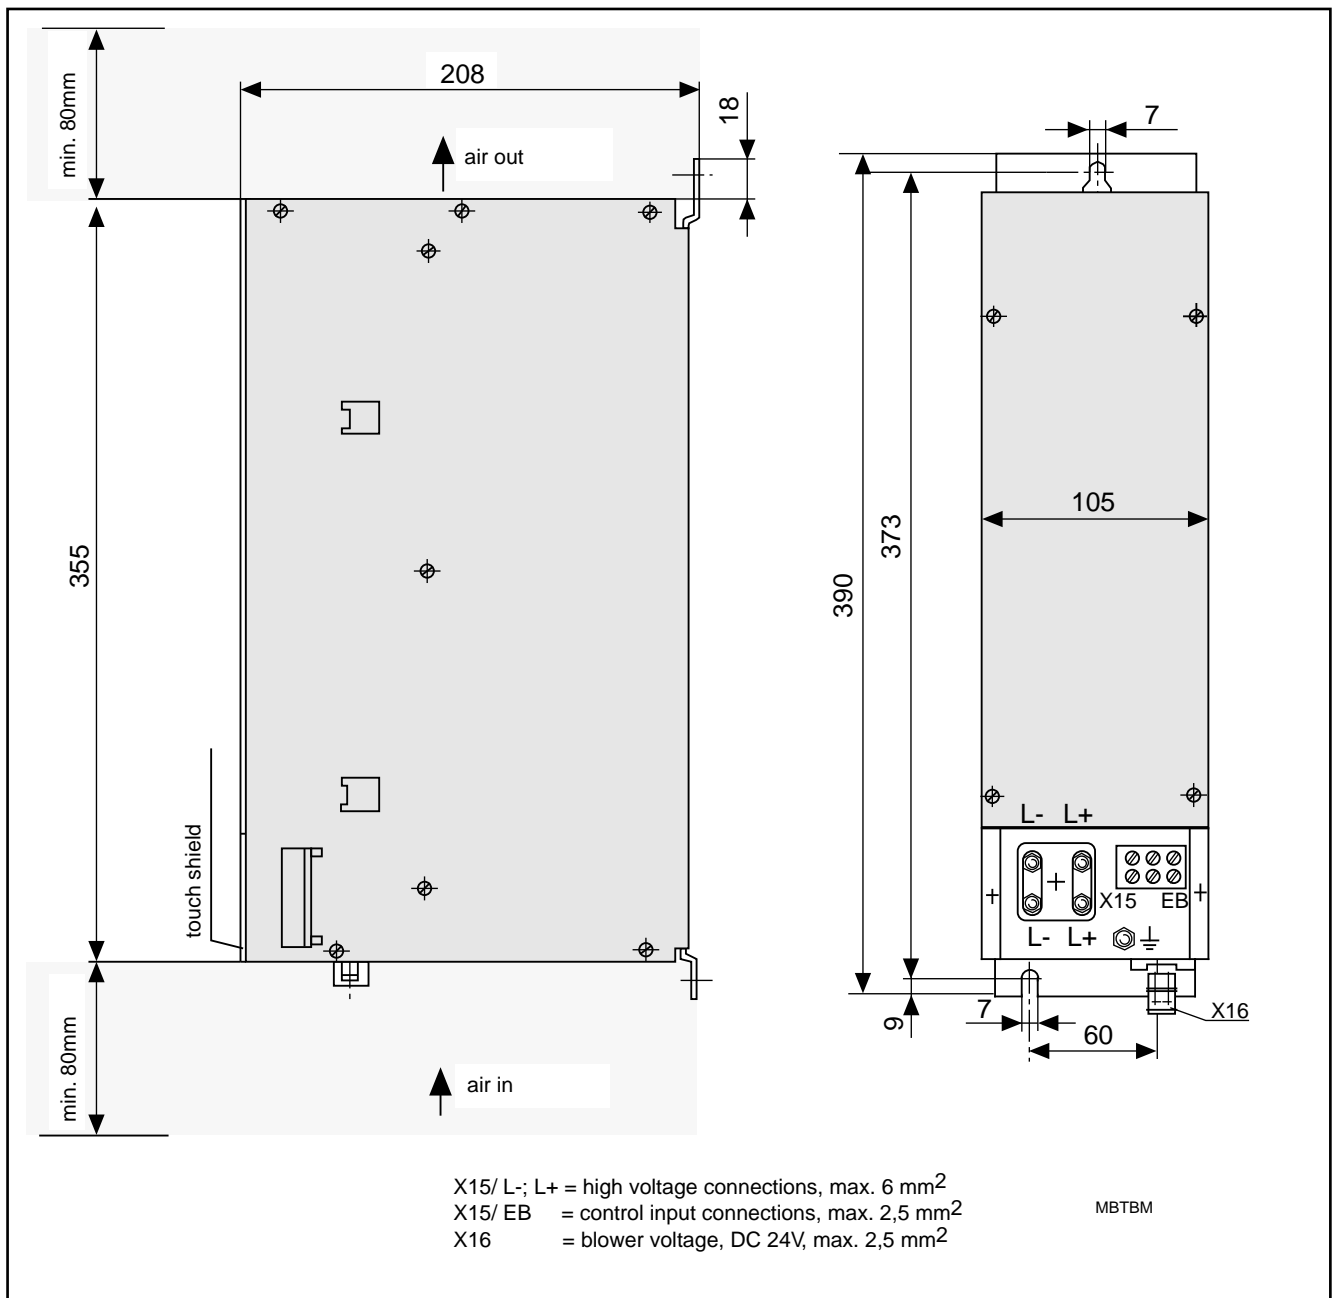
TBM 1.2 auxiliary bleeder module dimension sheet
